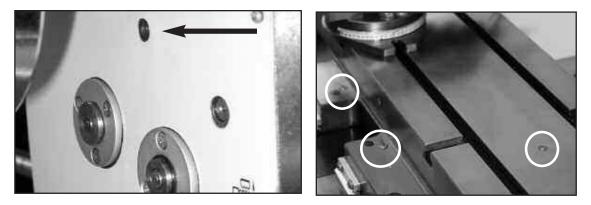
A & B Cross-Slide Screw Apron Oil Points and Cross-Slide Screw Table Oil Points
